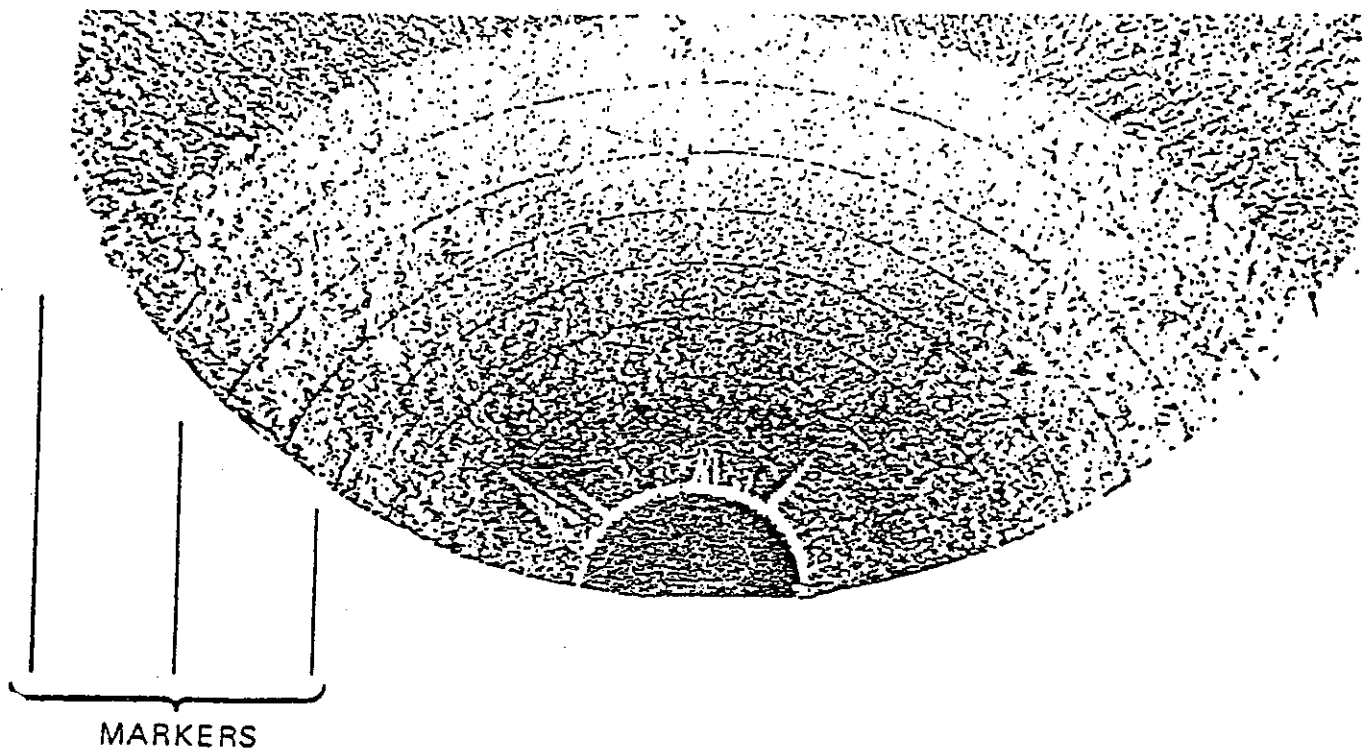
Semicircular Crack Front in Failed Bolt
